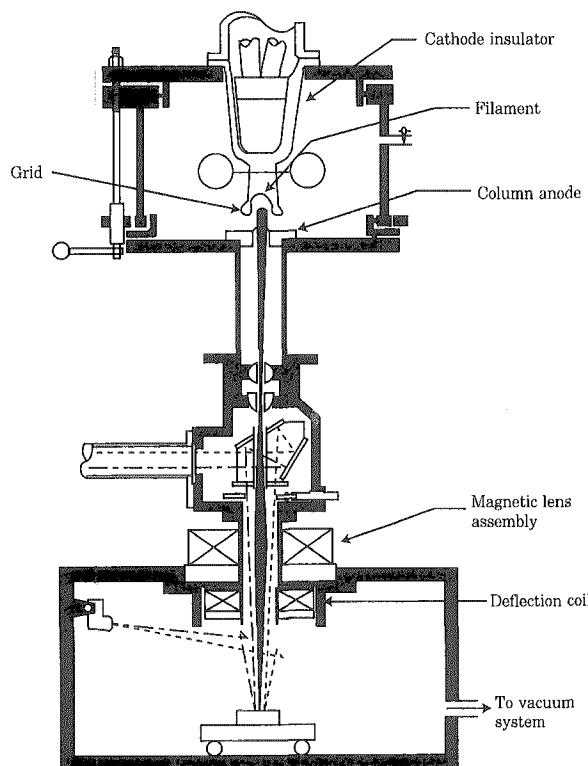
Simplified diagram showing the essential parts of EB welder
